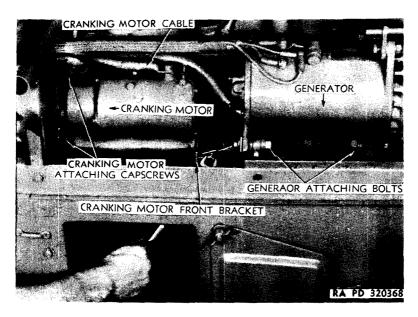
Removing Cap Screw from Cranking Motor Bracket
